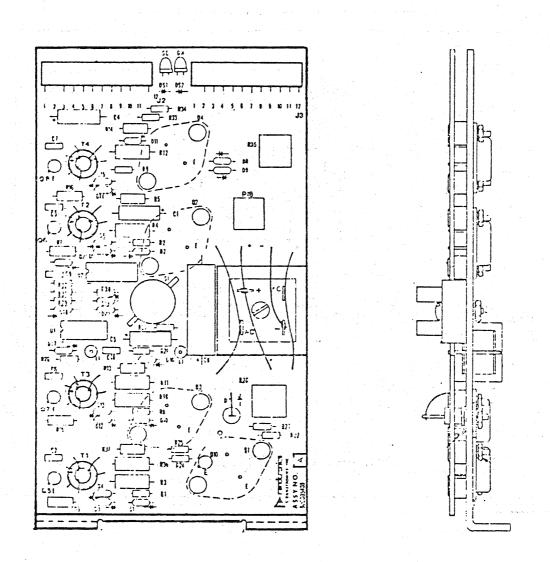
AUXILIARY BRIDGE COMPONENT LOCATION
